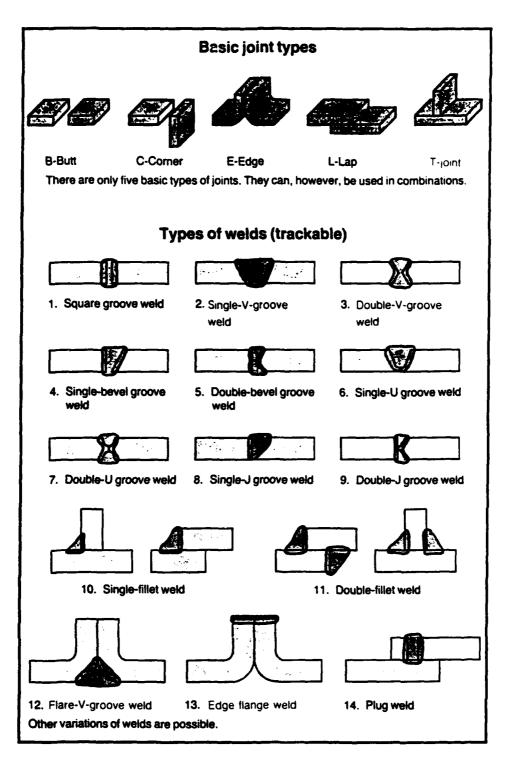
Some joint and weld types trackable by vision systems [17]
